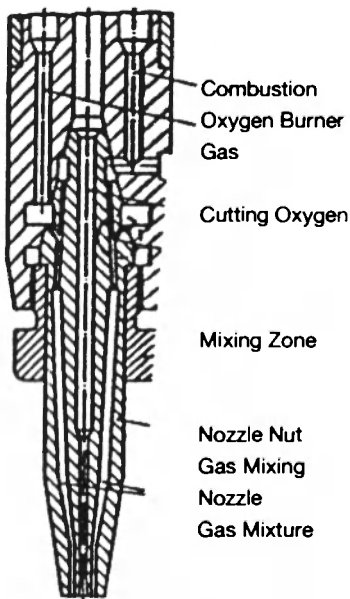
Cutting System for Low-Pressure Torch (two piece)
